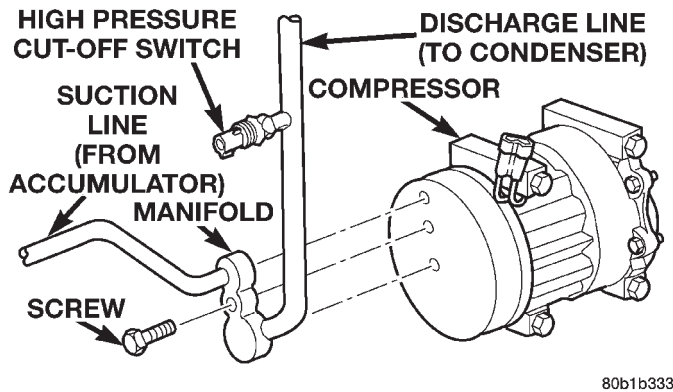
Suction and Discharge Line Remove/Install - Diesel Engine
